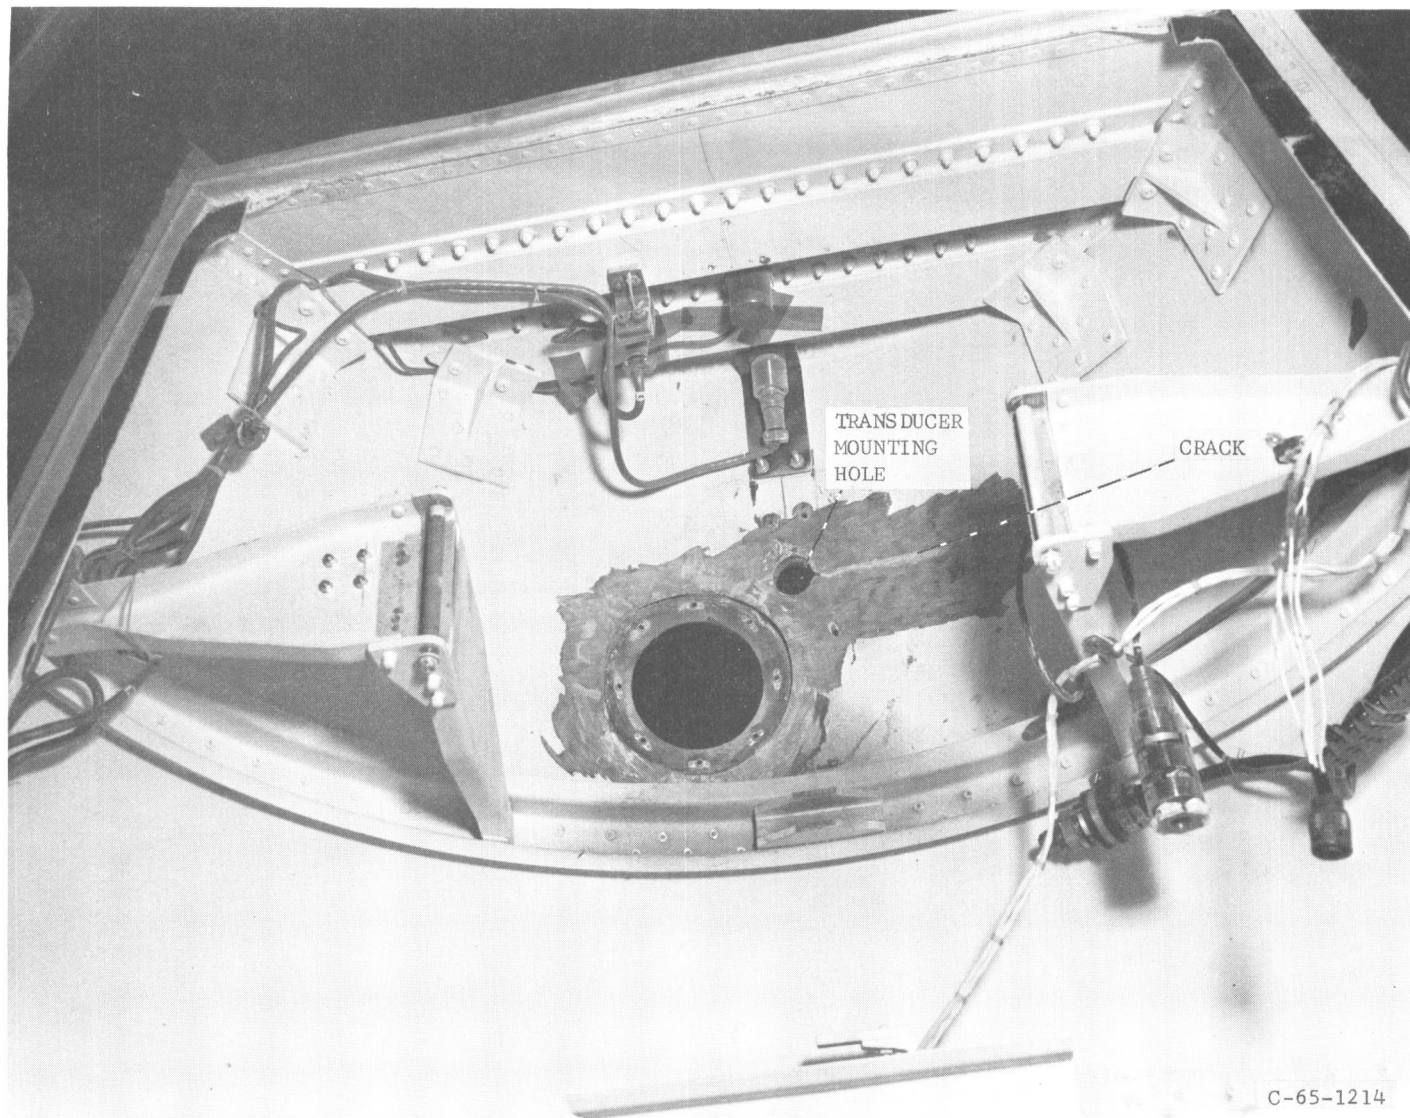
Crack in fairing wall caused by the transducer contact with catcher, test 1A-3.
